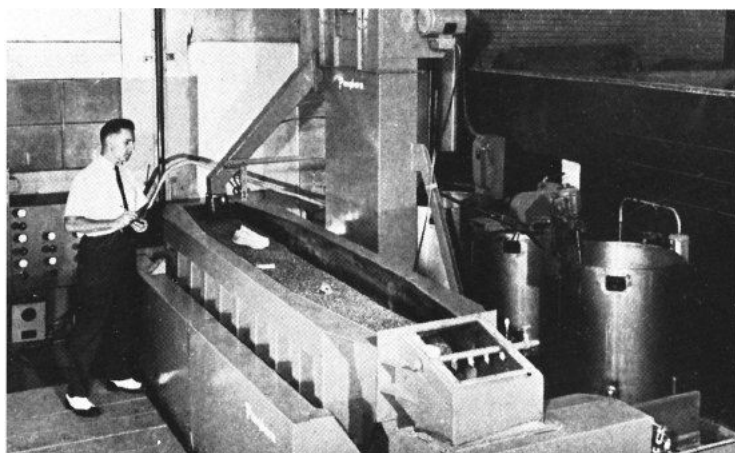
Vibratory finishing process. (Reprinted courtesy of the Society of Manufacturing Engineers, © 1964 The Tool and Manufacturing Engineer.)
